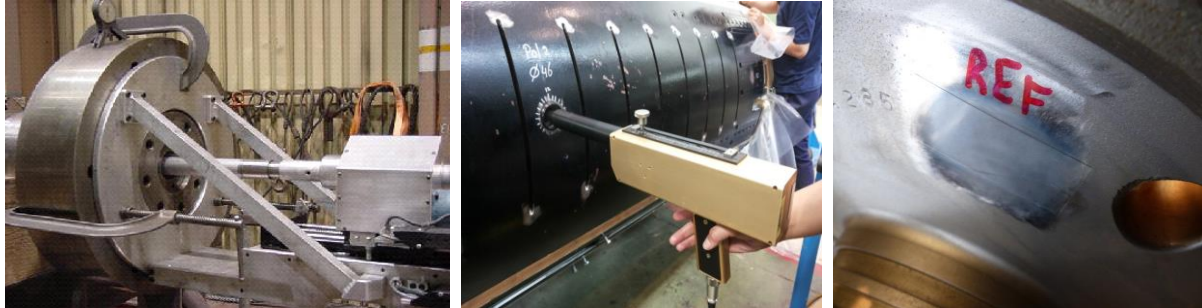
Left: axial boresonic inspection; middle: radial rotor bore inspection with ET; right: surface prepared for replication.
